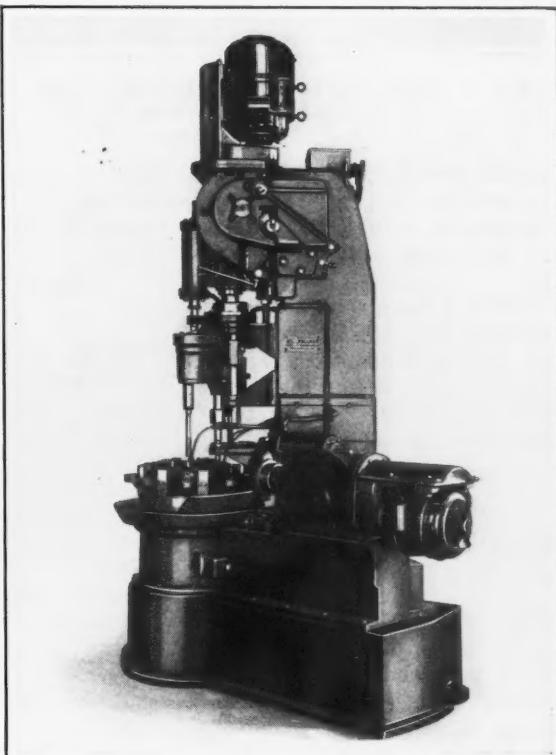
Millholland Drilling Machine which can be Indexed 720 Times per Hour
